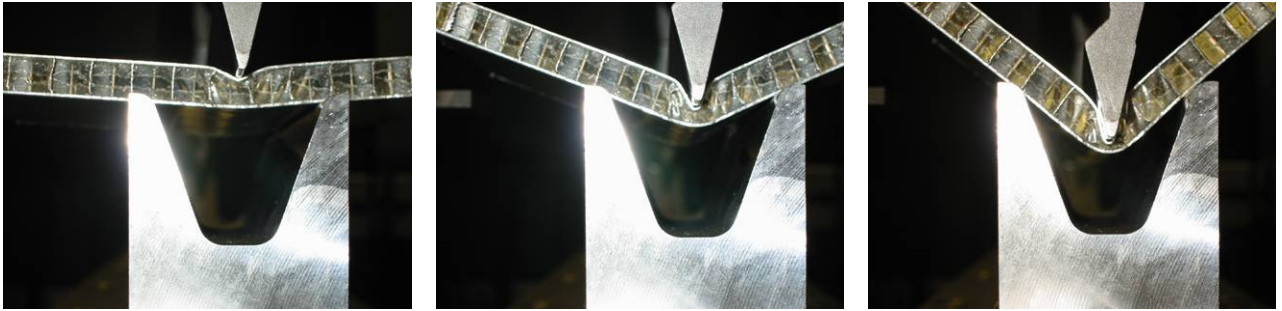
Bending on the SAFAN press brake and measuring the outer skin radius
